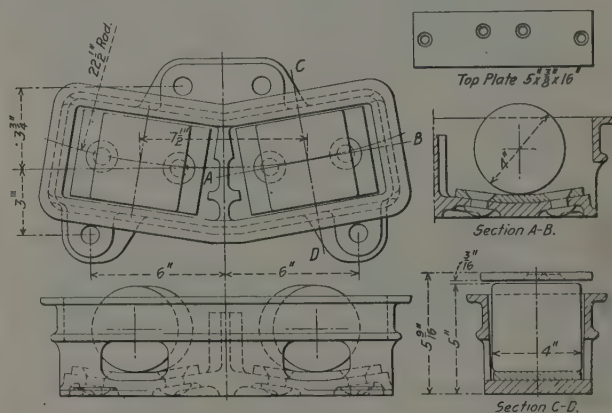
Stucki Two-Roller Type Side Bearing. A. Stucki Company.
